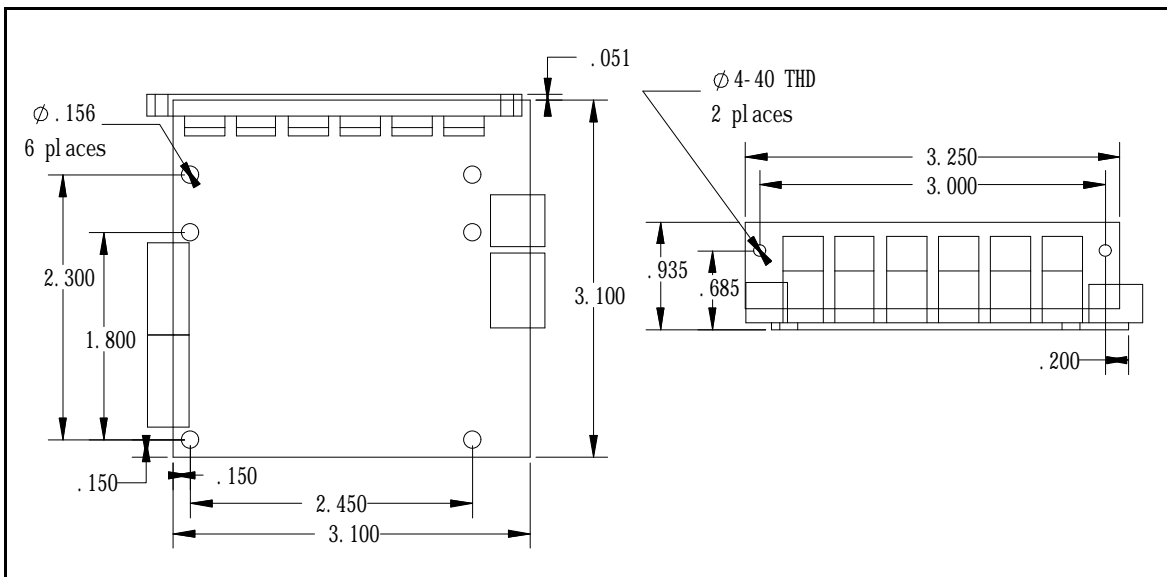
PIC-SERVO 3PH Motor Control Board Dimensions
